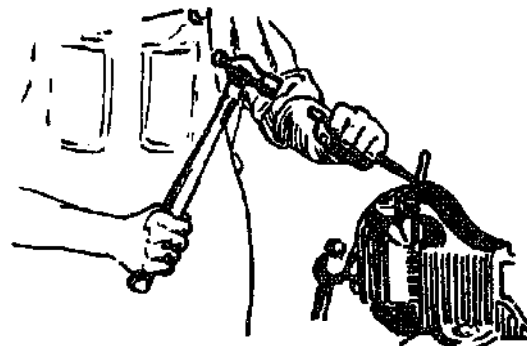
To cut rod or small bar stock to rough size, nick it on opposite sides and bend it until it breaks. Note proper method of holding chisel and hammer.
